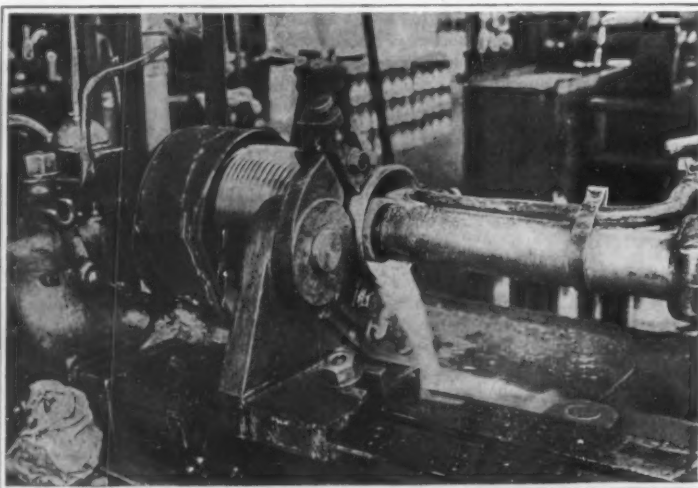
Grinding process in finishing, where a mirror-like surface is obtained in the bore of a cylinder.
